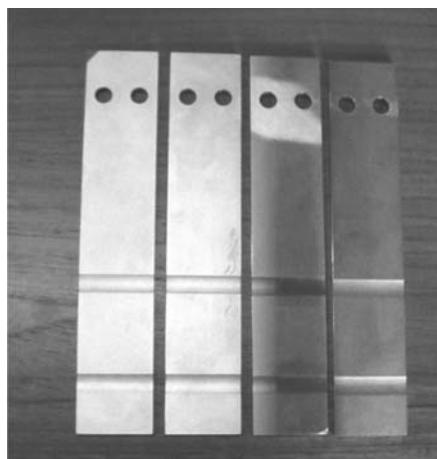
Sliding/Fretting Wear Test Plates Showing Type 2 Defects (grooves).
